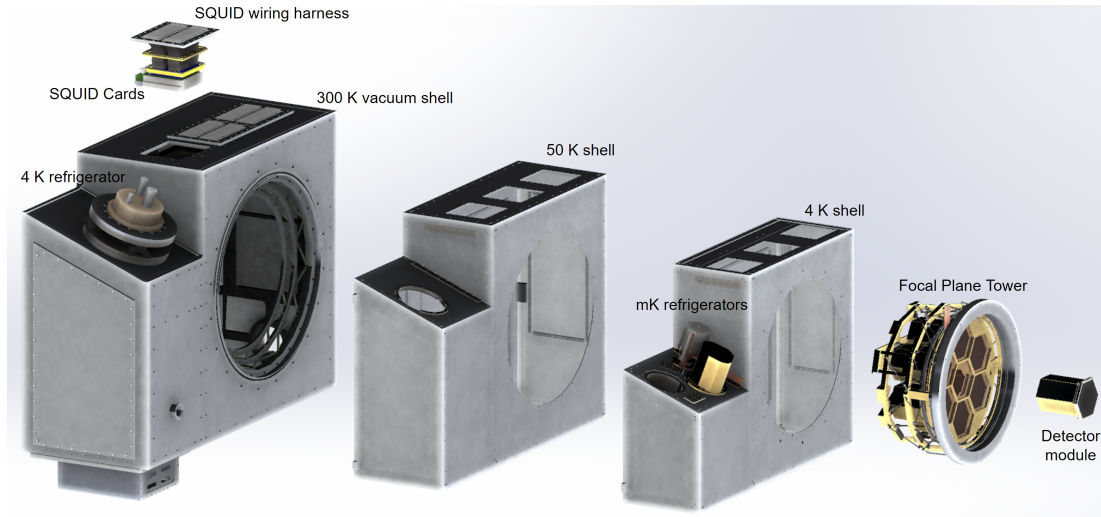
Exploded view of the of the POLARBEAR-2B receiver CAD model [153]. A description is given in the text.
